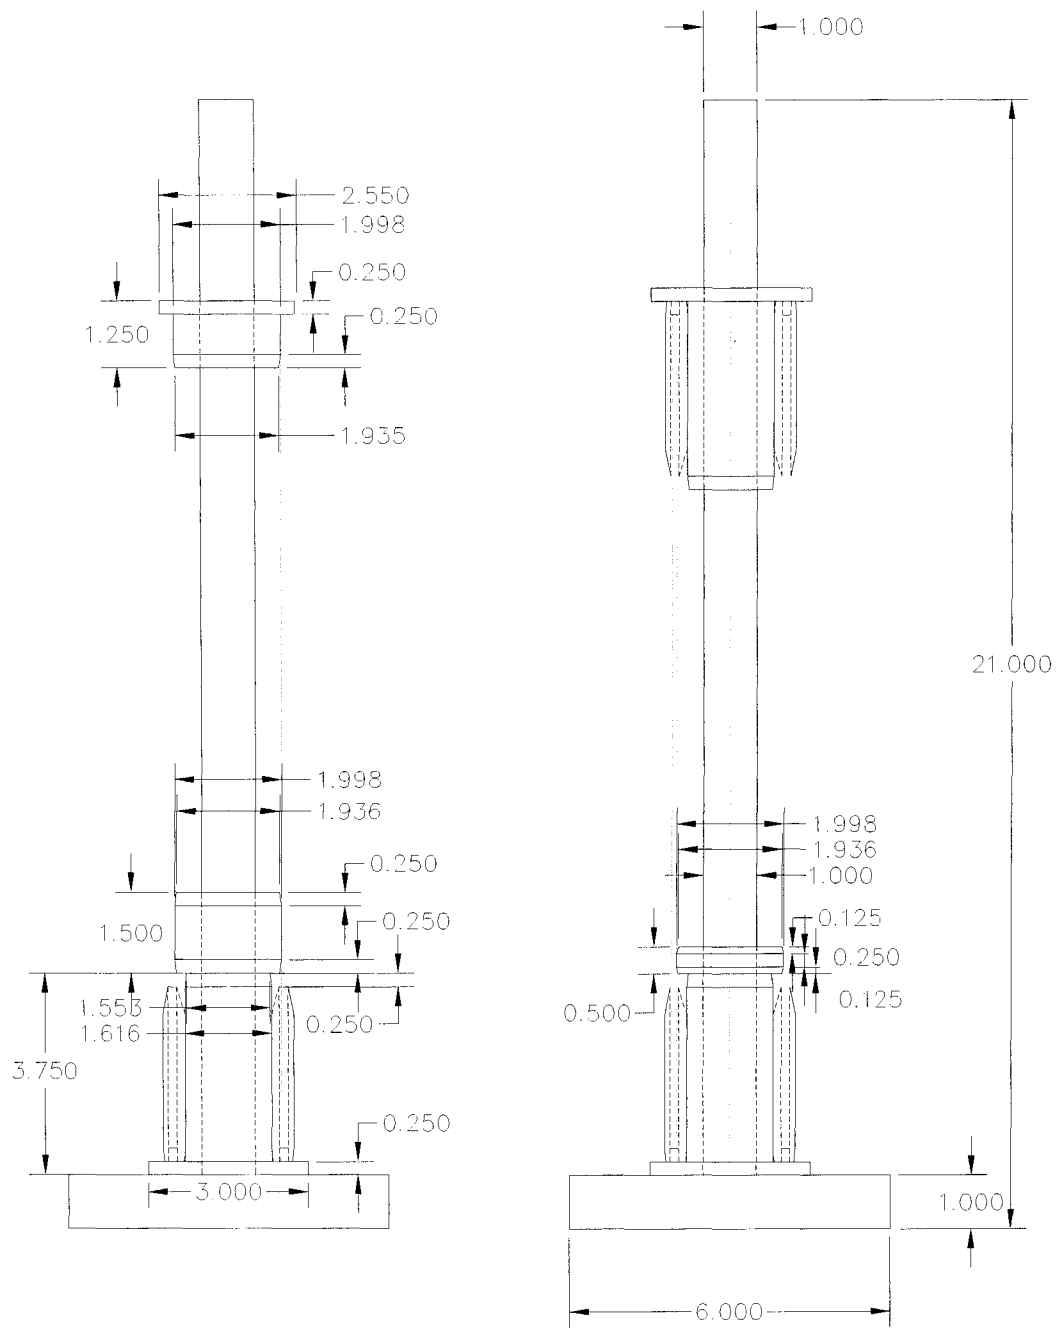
Drawing of jig used to align aluminum tabs during bonding to the specimen ends.
